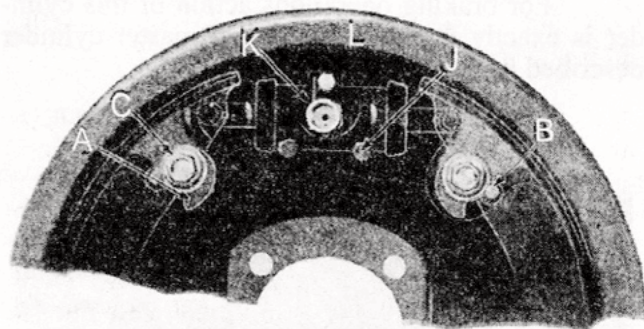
Frame side of backing plate used on Lockheed brakes
